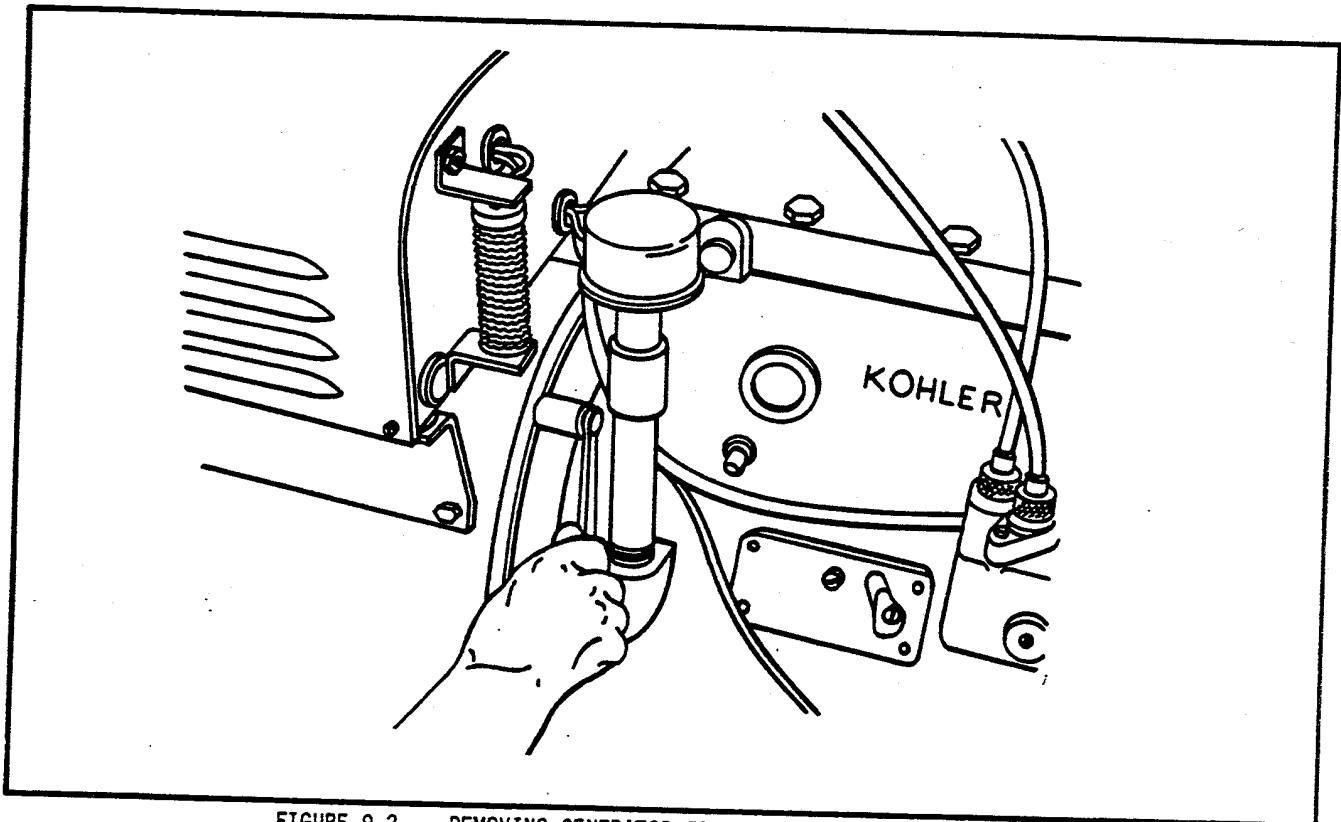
REMOVING GENERATOR FRAME - FAN HOUSING CAPSCREWS
